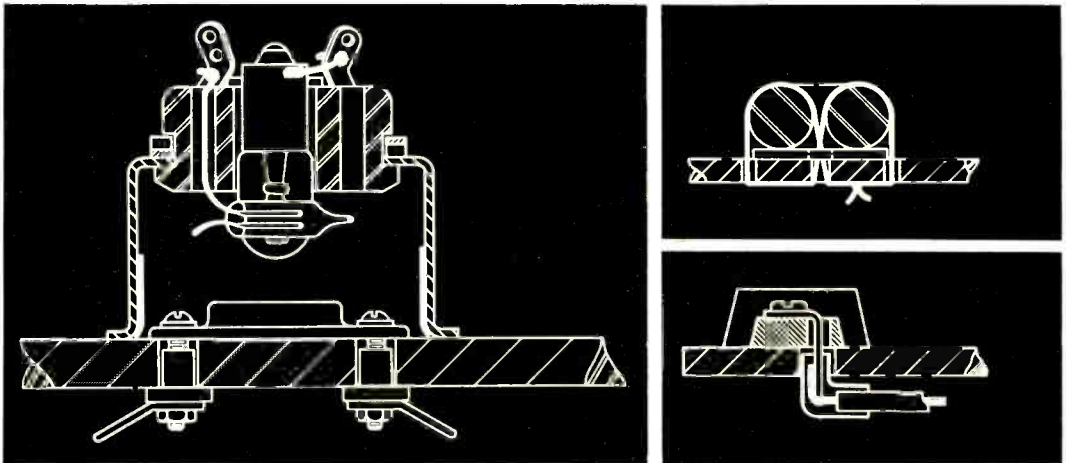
Modify octal socket by drilling out center to $\frac{13}{32}$ "; remove odd pins 1, 3, 5, and 7, and wire as shown. The photocell must be centered under shield assembly; mounting hardware comes with cell.
